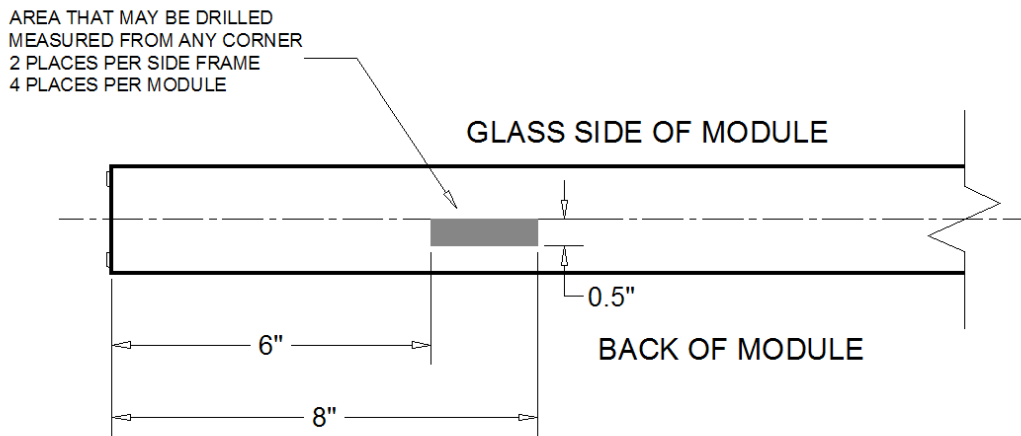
Acceptable Locations for Drilling the Side (Long) Frame
